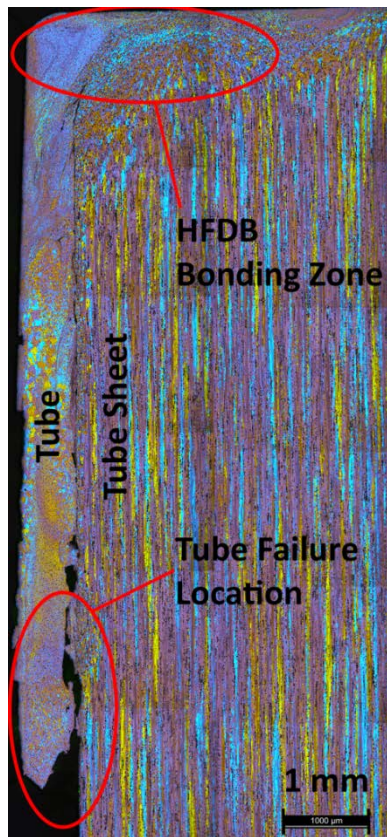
Exemplary macro graphic overview of the tube failure location in a HFDB tube to tube-sheet dummy weld after pull-out test; failure outside HFDB bonding zone
